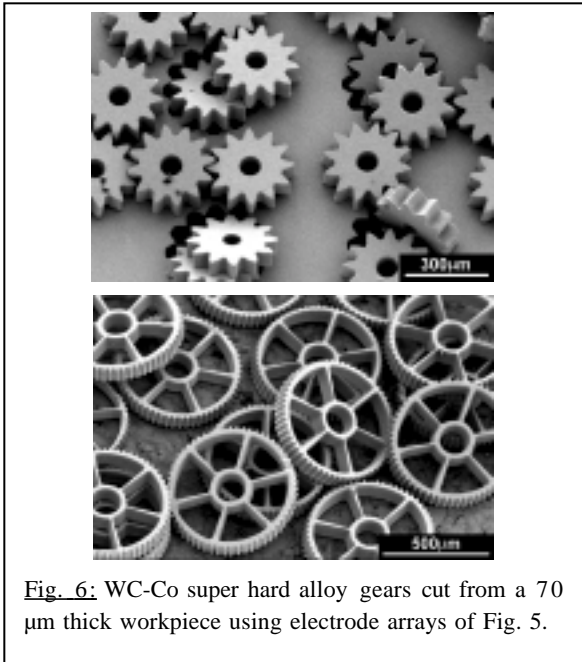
WC-Co super hard alloy gears cut from a 70 µm thick workpiece using electrode arrays of Fig. 5.
